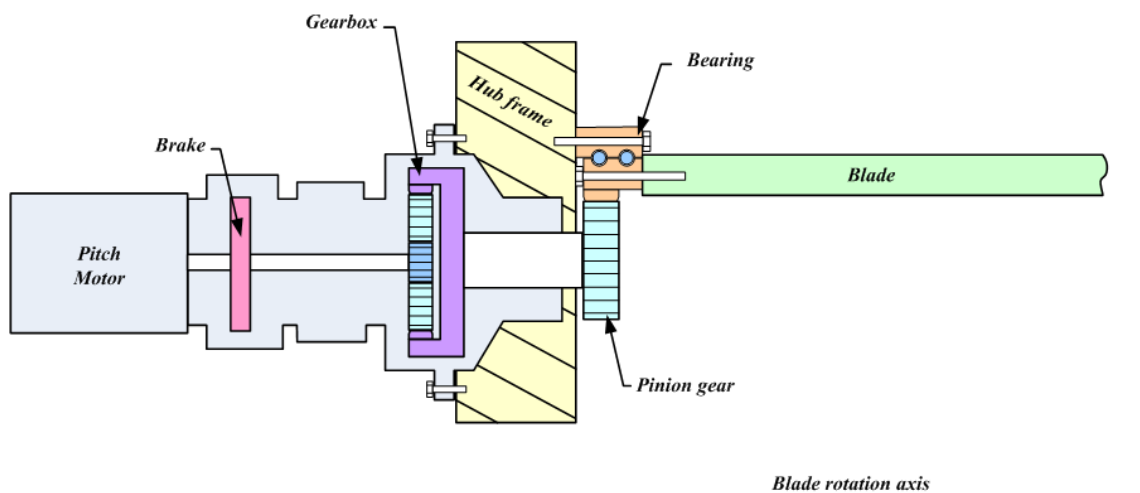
Sketch of pitch drive and connection to blade via slewing bearing (cross-sectional)
